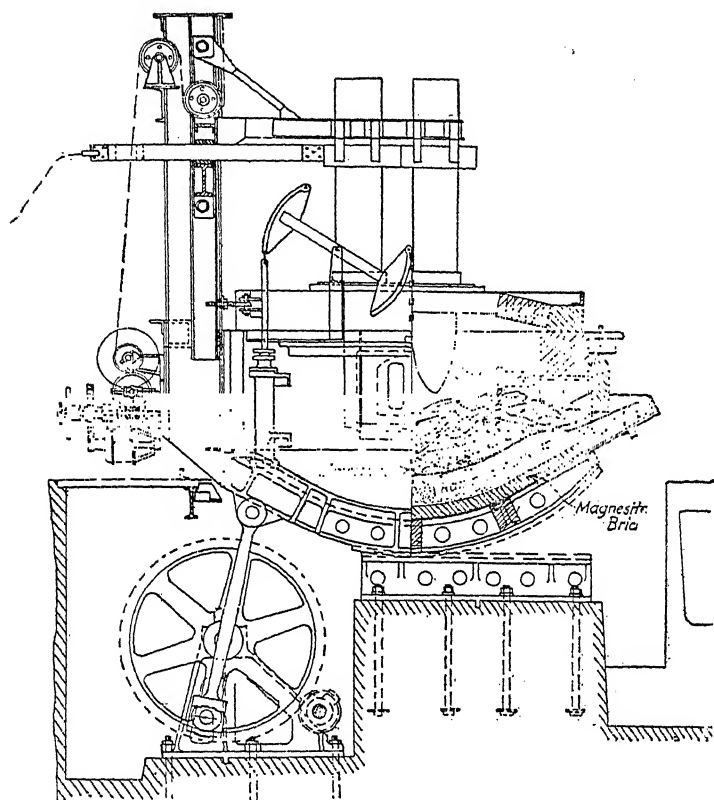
Section of 6-ton electric furnace showing bottom make-up.
